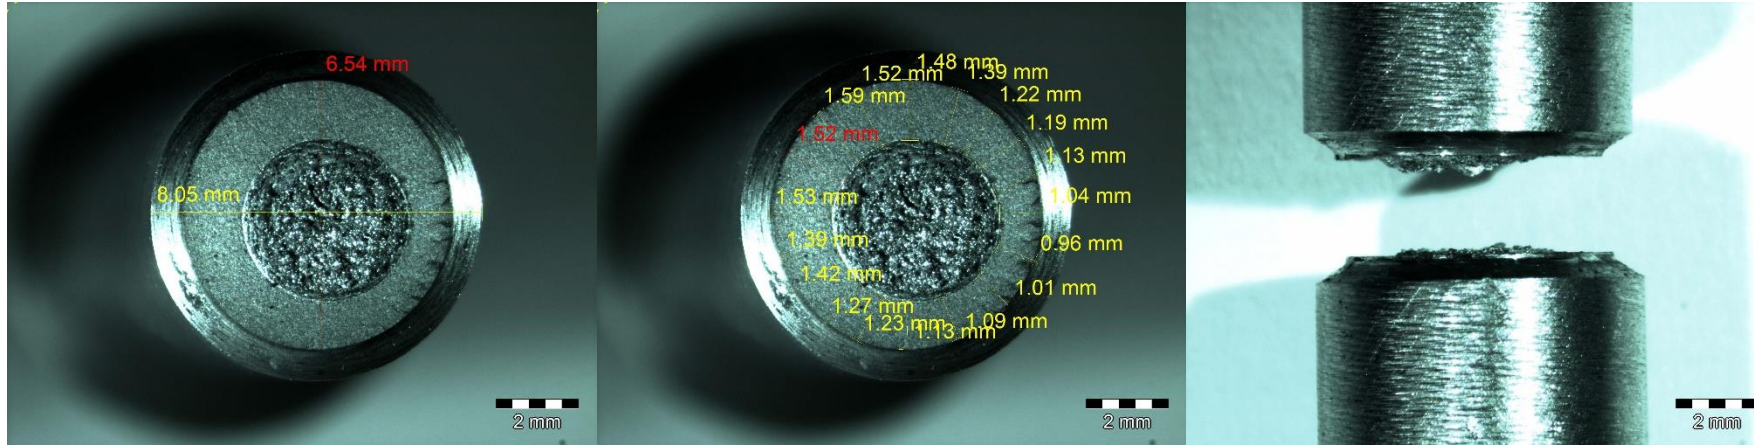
Cross-sectional and side view of fractured SCCRБ-06
